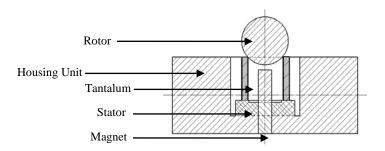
Side view and intersection of the proposed 3D USM for machine vision and robot guidance industrial applications
